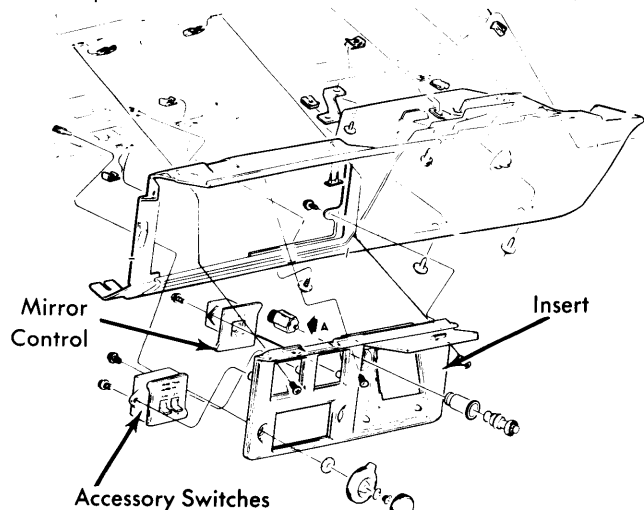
Cadillac Lower Right Instrument Panel (Seville)
